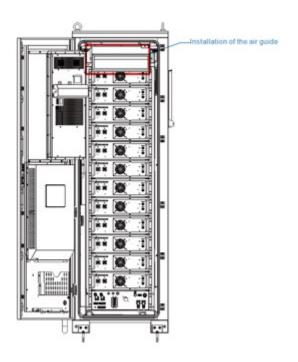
Reinstall The Removed Air Hood Schematic
